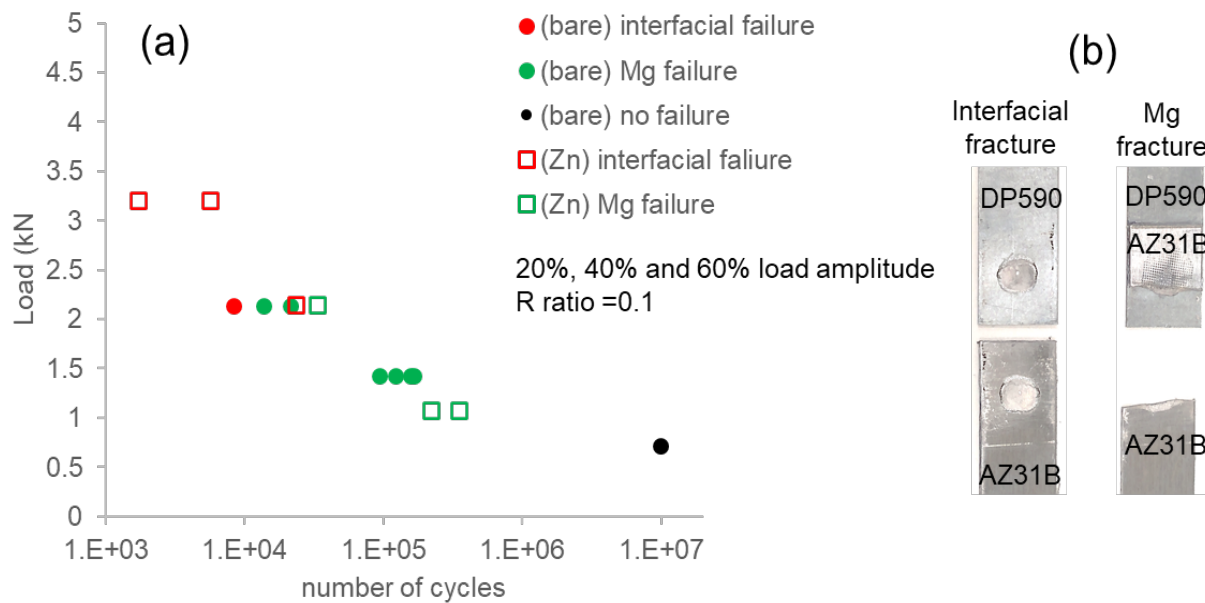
(a) Results of HCF testing on Mg-steel USW samples with fracture modes and test samples illustrating an interfacial fracture. (b) A Mg fracture. Source: ORNL.
